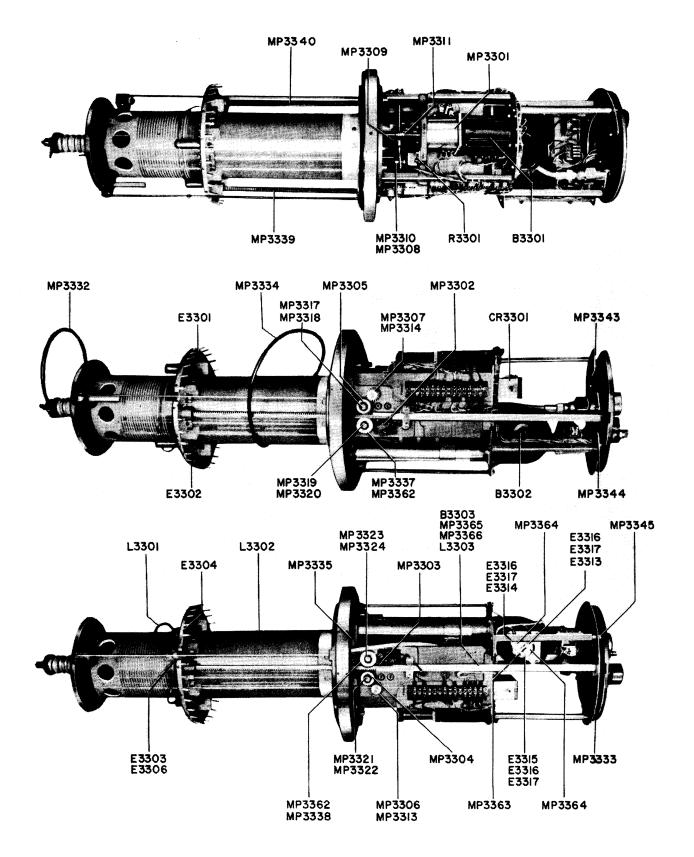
B. Mounting MT-2170A/WRT, L cation of Parts
